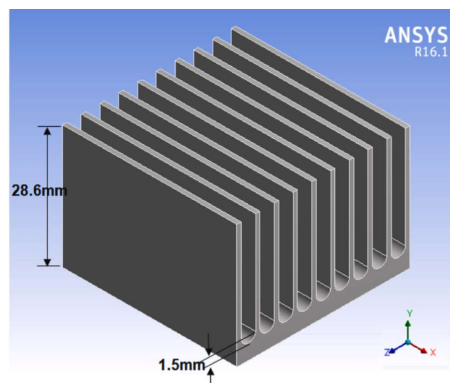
CAD model of novel plate fin heat sinks [22].
